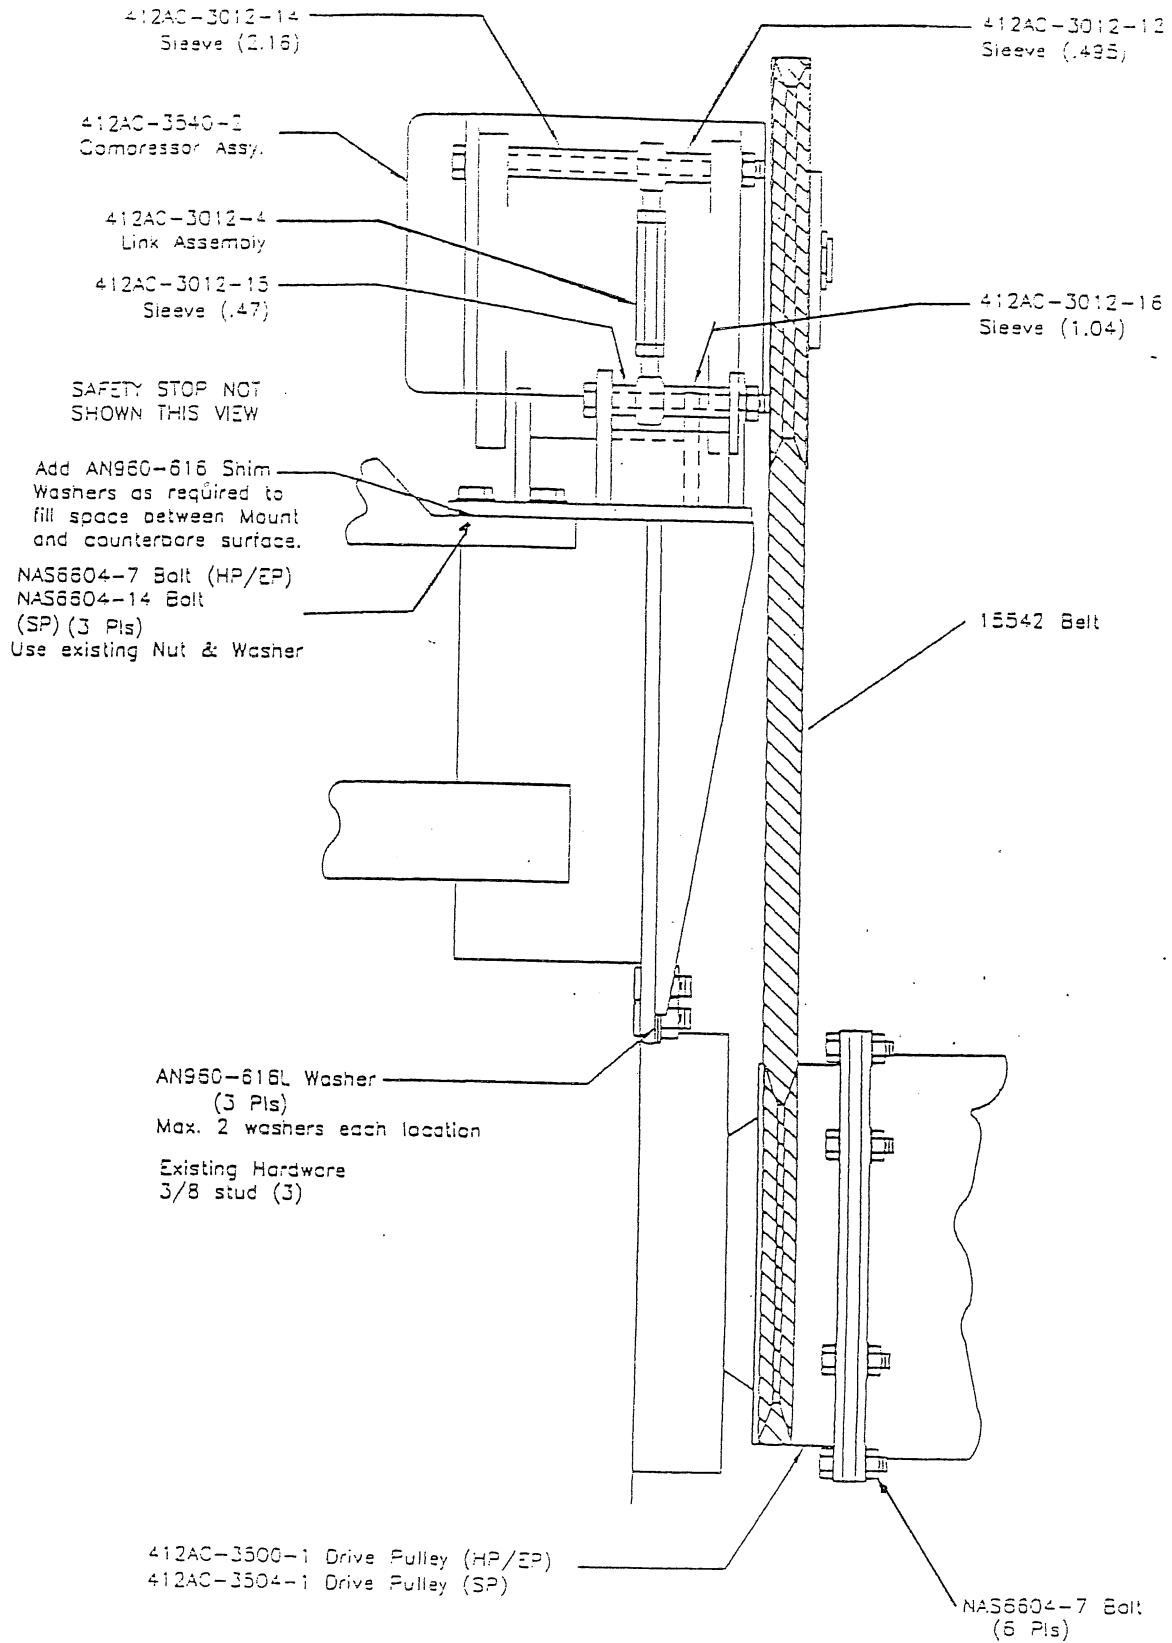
Existing Compressor / Compressor Mount Installation
